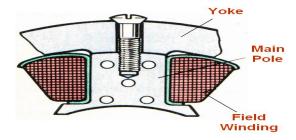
Cutaway view of DC Machines away view of DC Machines
